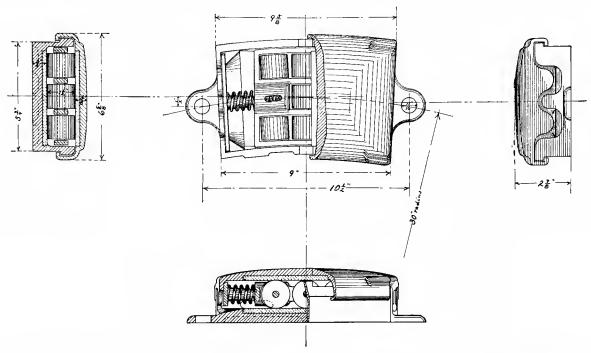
Perry Side Bearing for 50-Ton Capacity Freight Cars. Joliet Railway Supply Company.
